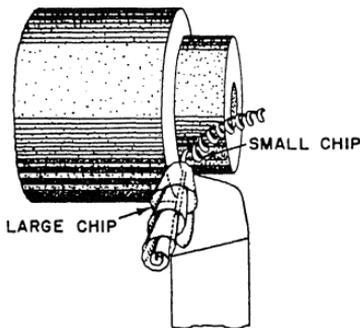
Double chip caused by grinding a chip breaker groove too close to the cutting edge.
